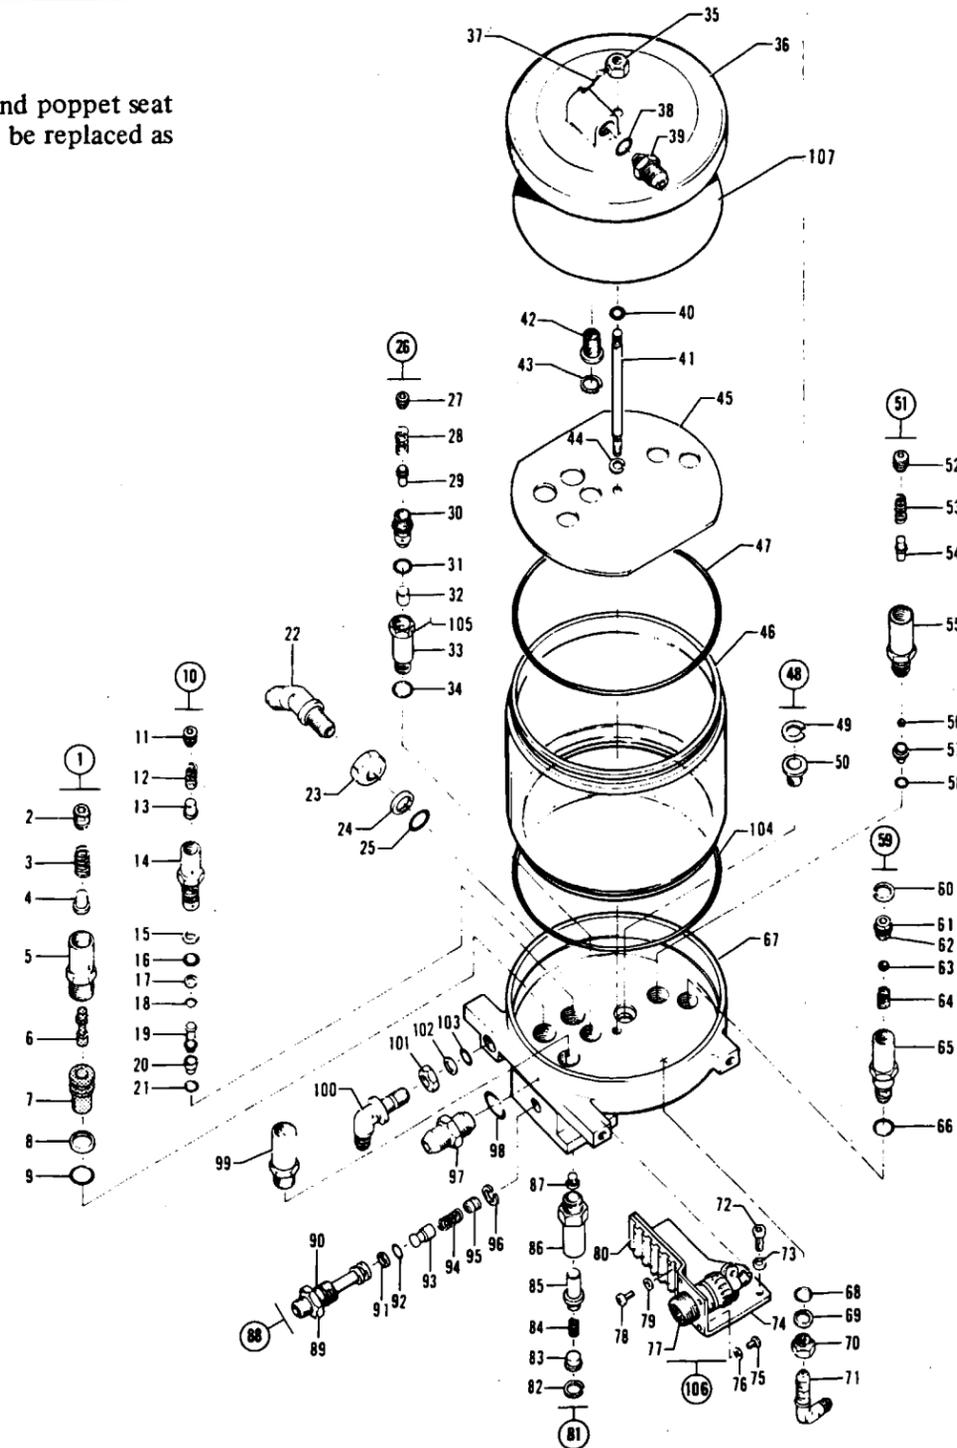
Hydraulic Power Pack (Wiebel Tool)
